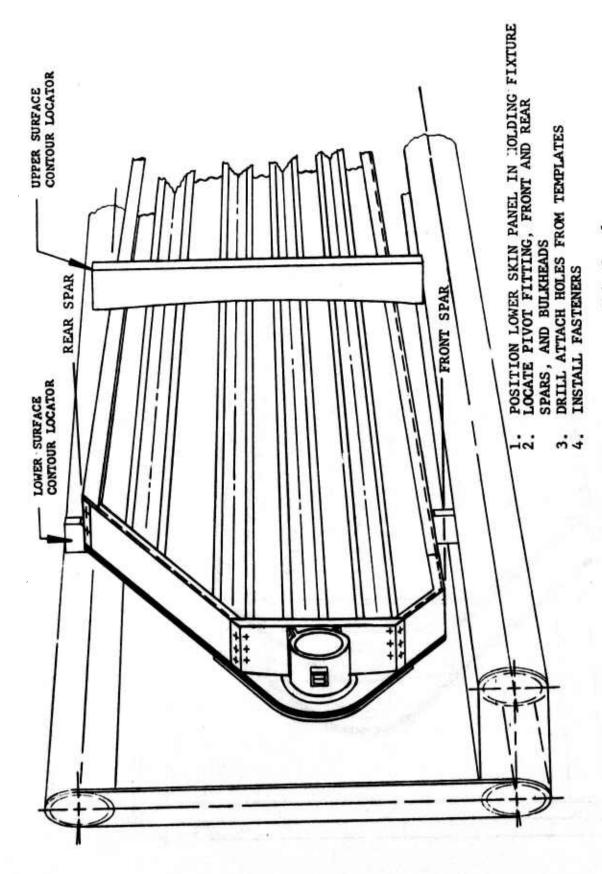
Secondary Manufacturing Lower Skin Panel and Understructure Assembly
